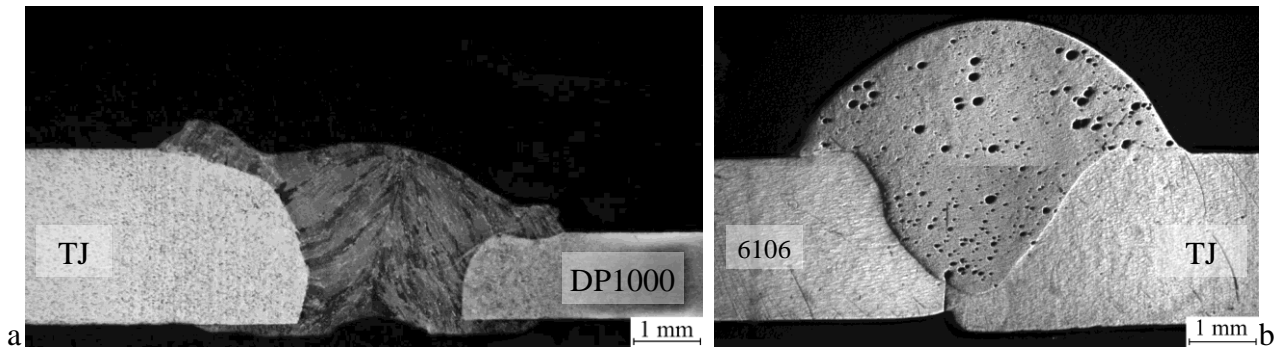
Cross sections of hybrid joints, showing the weld bead between the transition joint (TJ) and the DP1000 steel sheet in a type C joint (a), and the weld bead between the transition joint and the 6106 Al alloy sheet in a type B joint (b).
